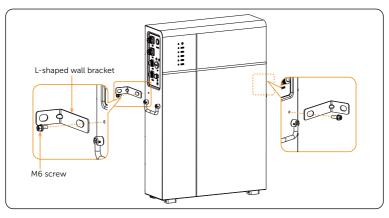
Fixing L-shaped wall bracket to the battery pack
